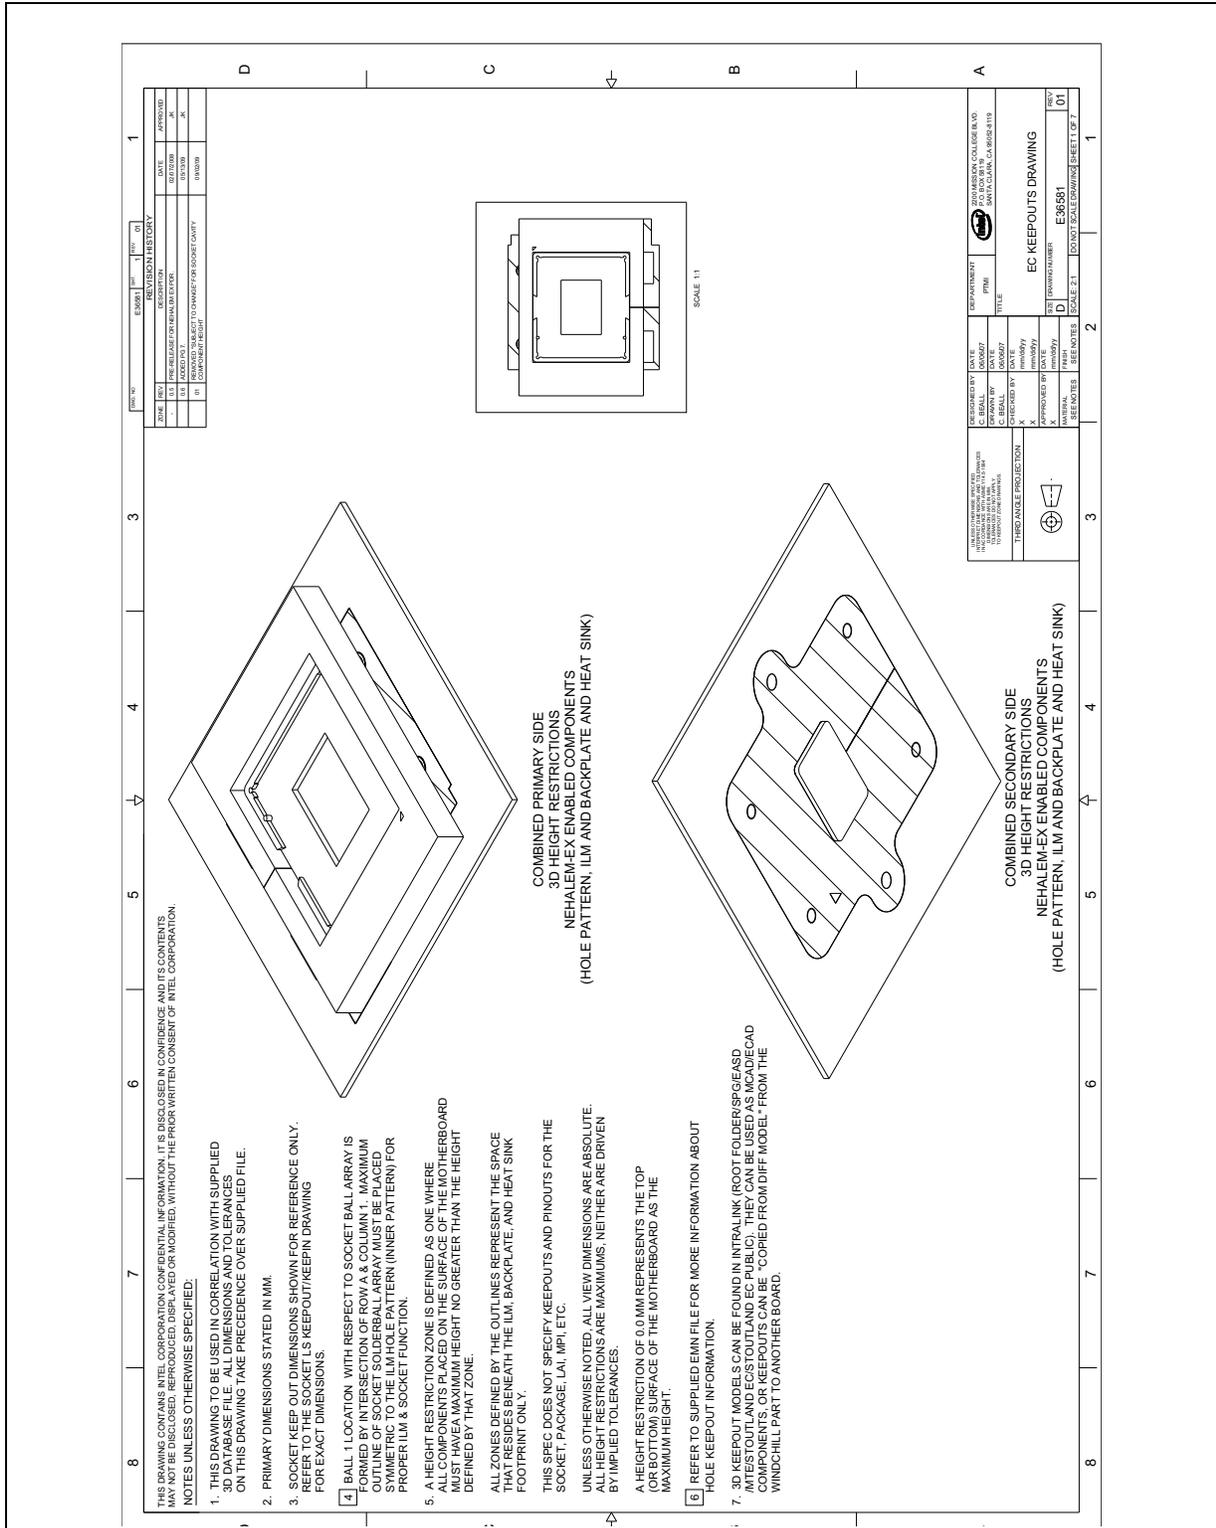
Enabled Component Board Keepout Mechanical Drawing – Sheet 3 of 7
